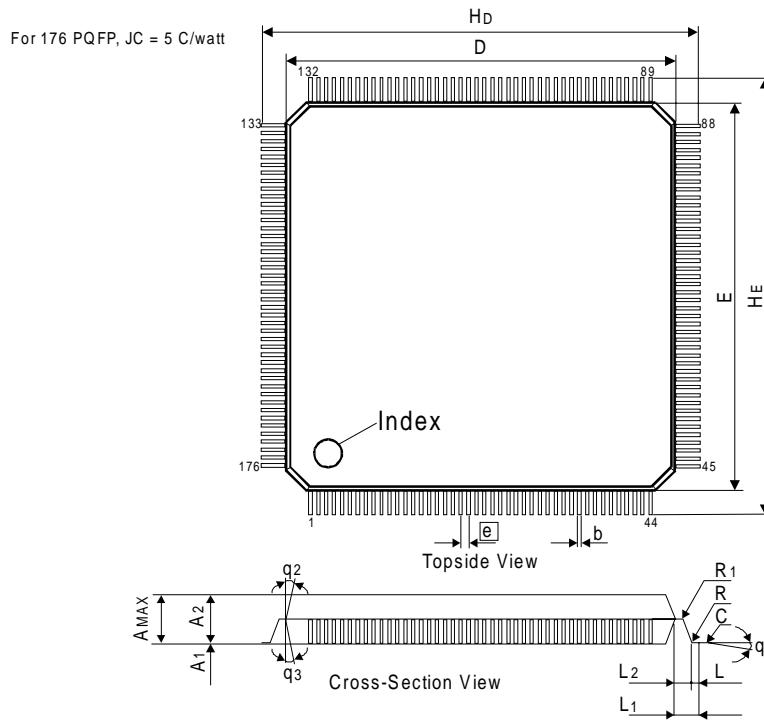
176-Pin PQFP Package Mechanical Dimensions
